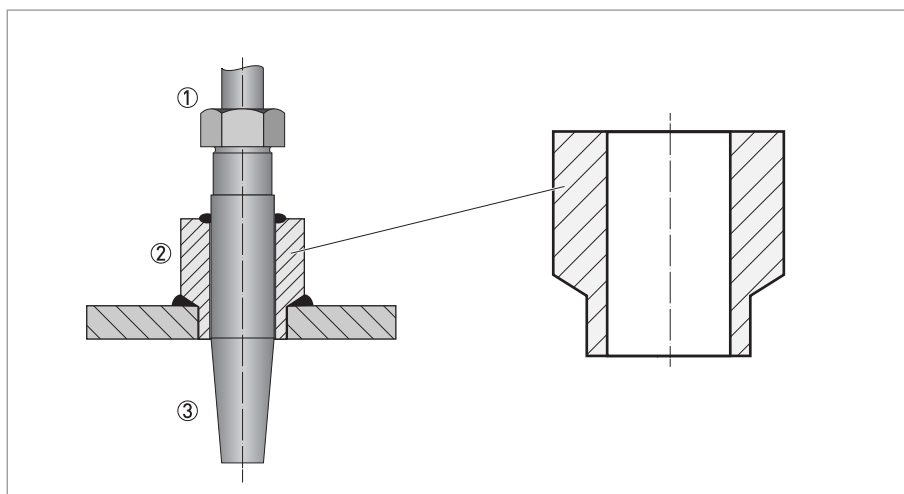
Welded sleeve for thermometer thermowells according to DIN 43772, Form 4
